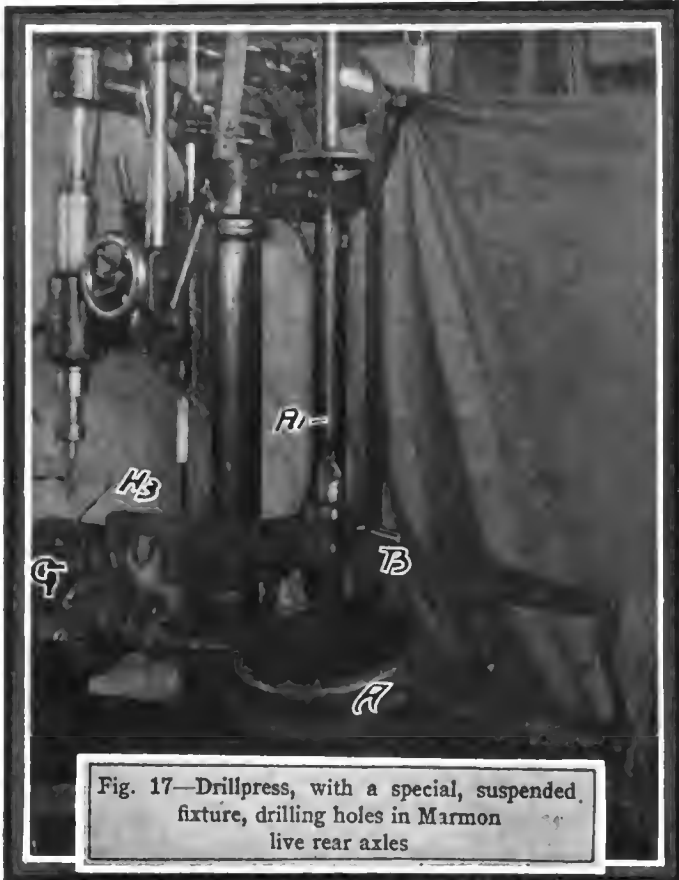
Drillpress, with a special, suspended fixture, drilling holes in Marmon live rear axles
